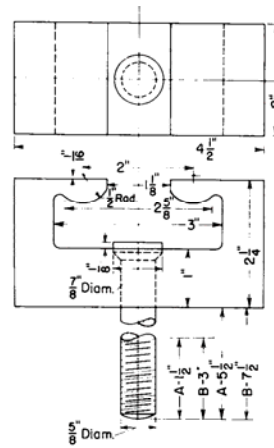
Tension-Perpendicular-to-Grain Test Assembly
